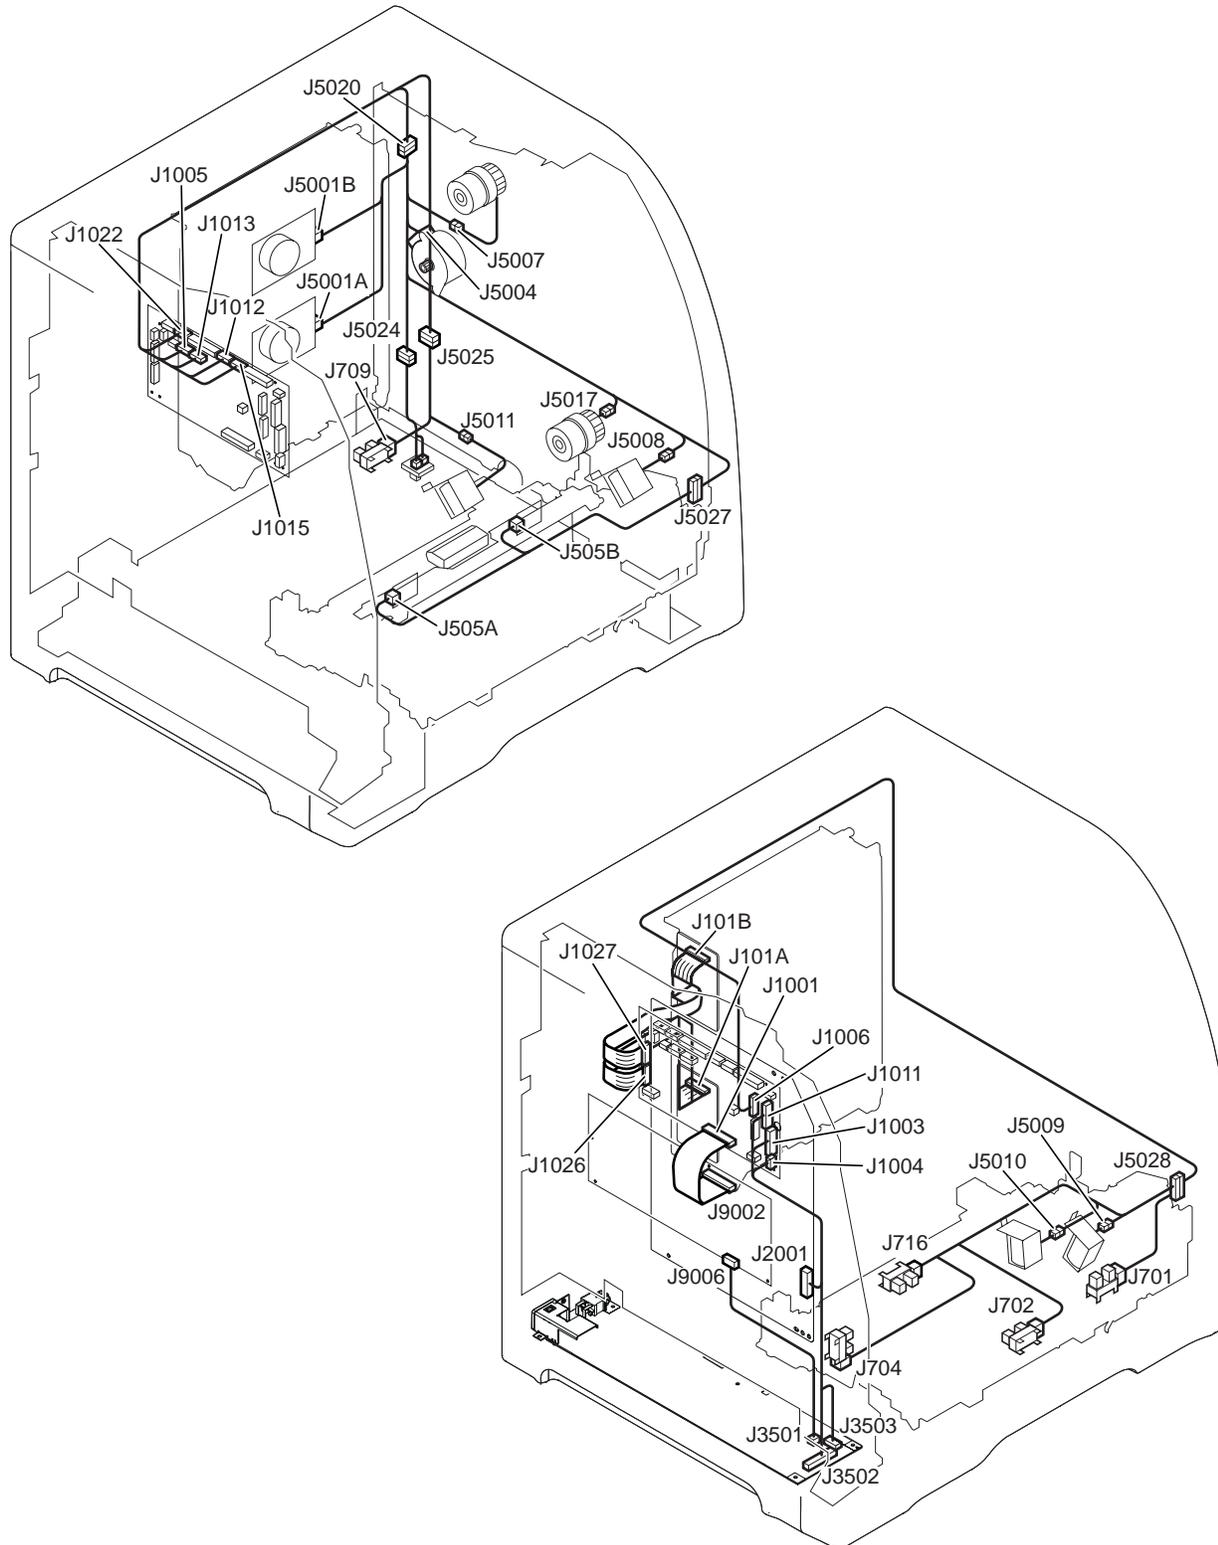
Location of DC controller PCB connectors (HP 3700)
